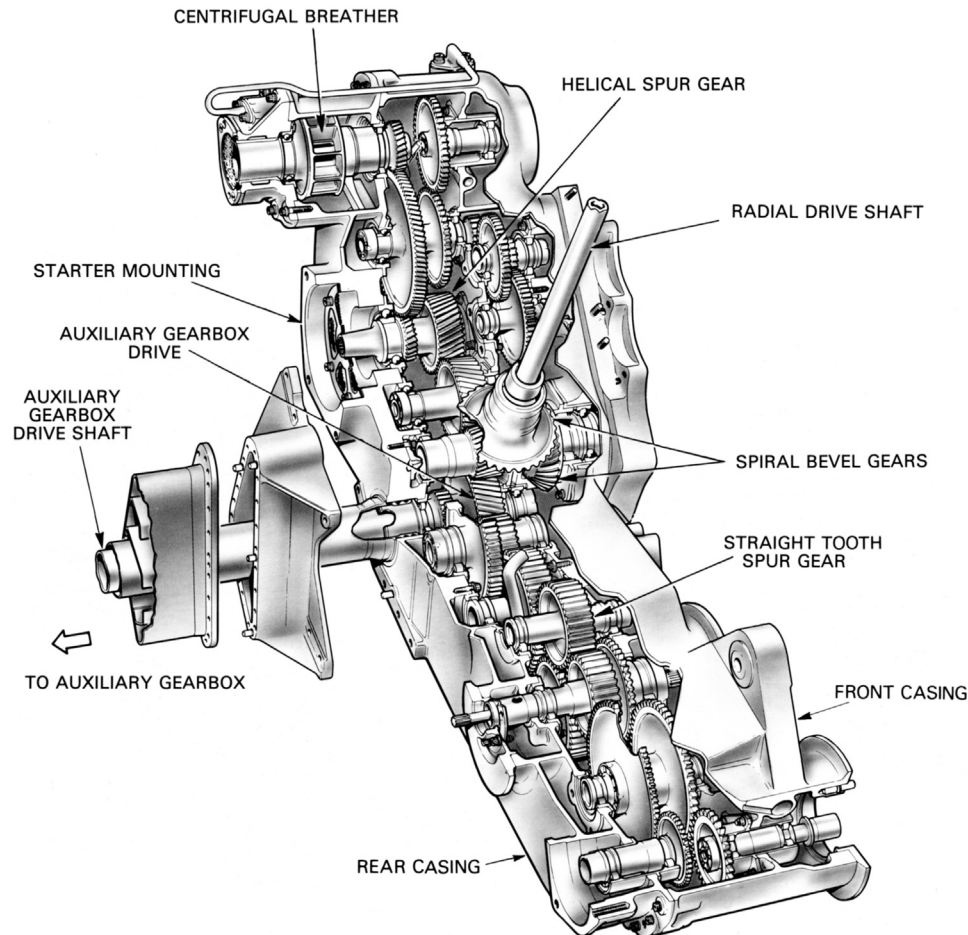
An external gearbox with auxiliary gearbox drive. (Source: Rolls Royce.)
